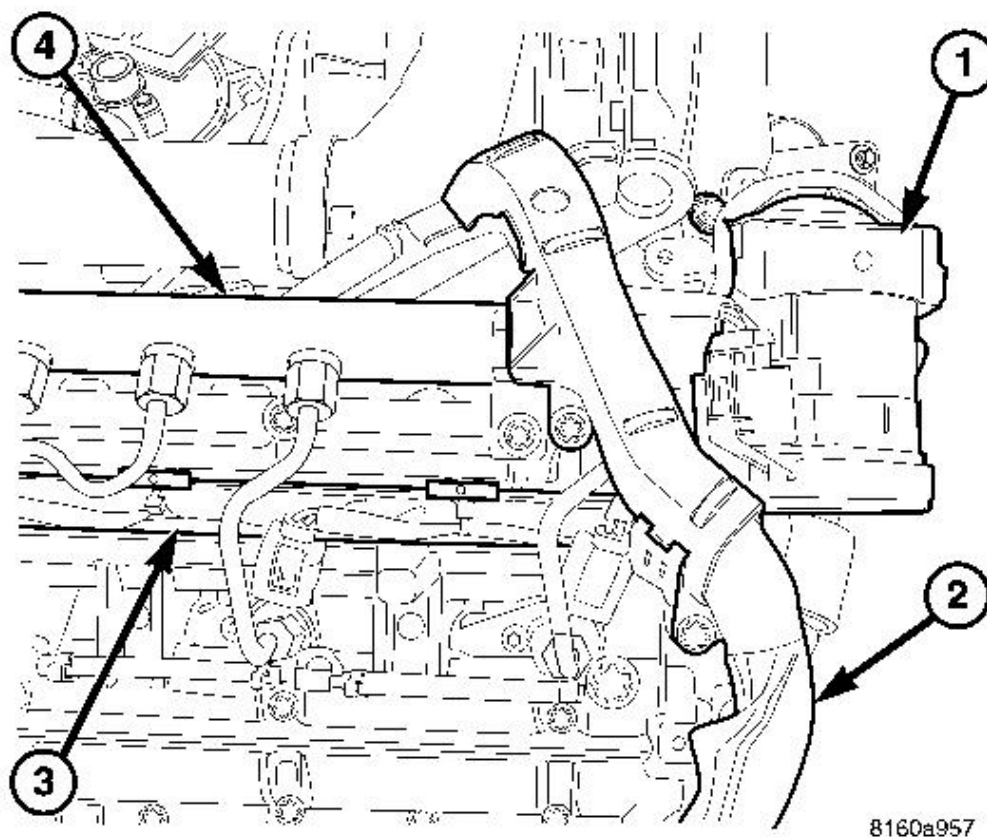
Fuel Injector Body & Left Fuel Injectors
